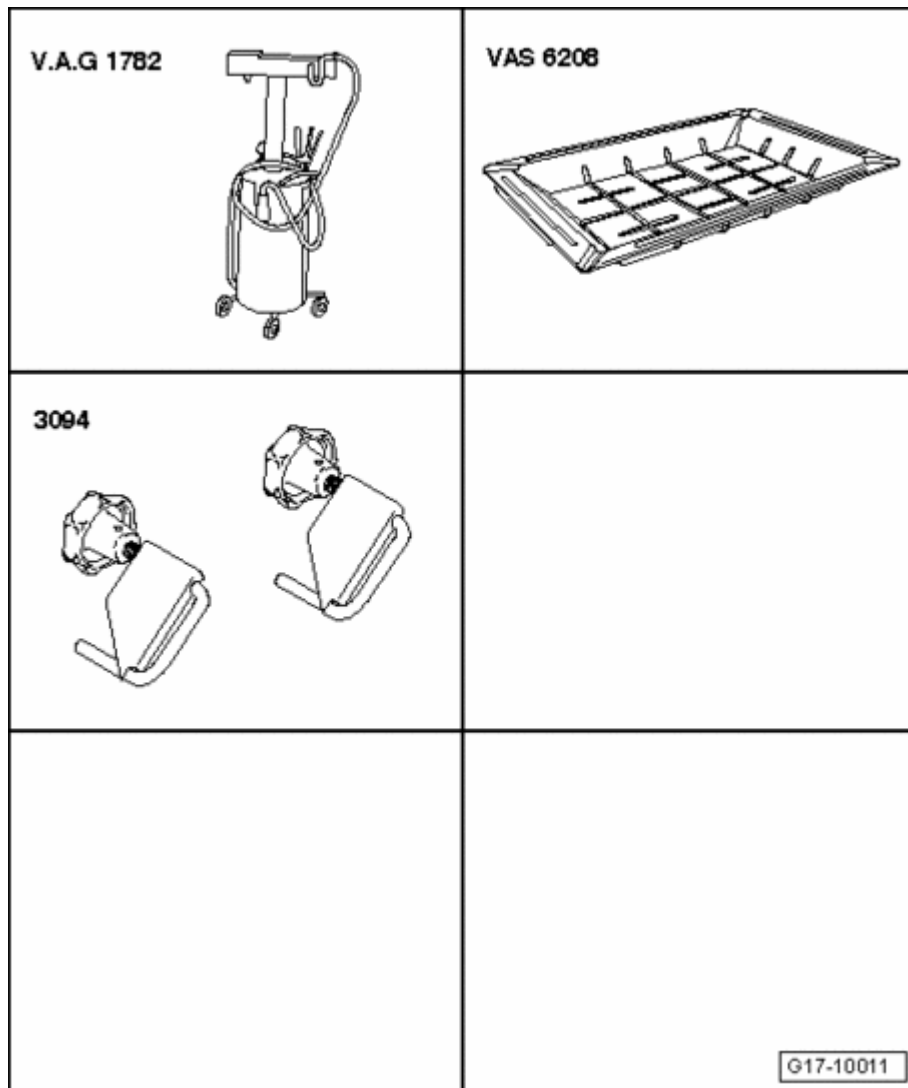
Identifying Special Tools - Oil Cooler, Removing And Installing
